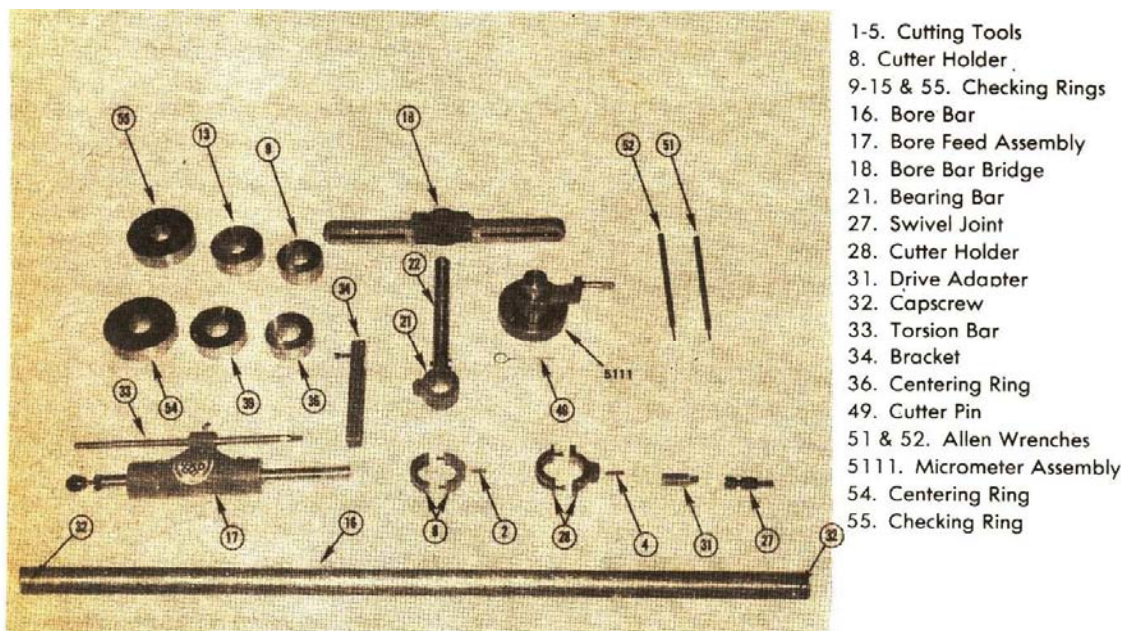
Exploded view of the ST-1177 Boring Tool
